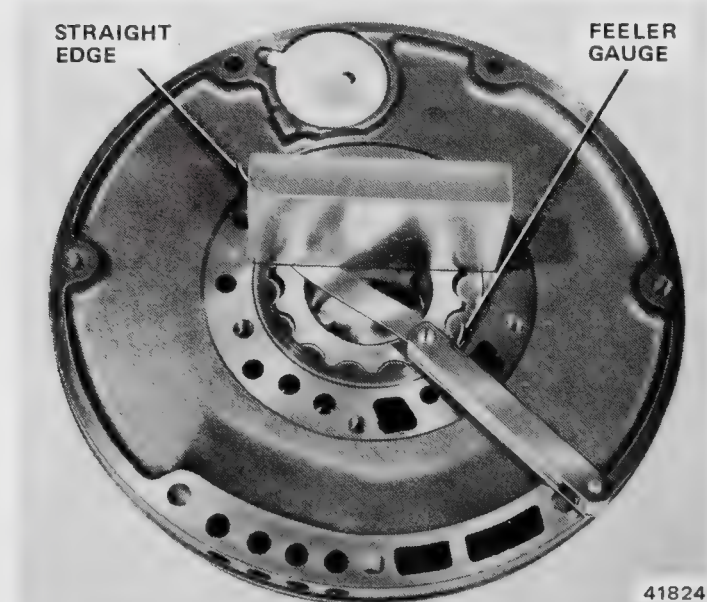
C-68 Measuring Pump Rotor End Clearance—Model 727
